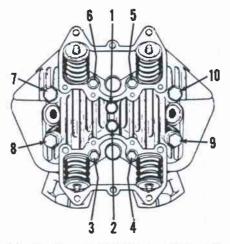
A-Cylinder head retaining screws and stud nuts should be tightened in sequence shown for 750cc models. Special nuts are used at locations (3, 4, 5 & 6) which accept rocker box screws.
